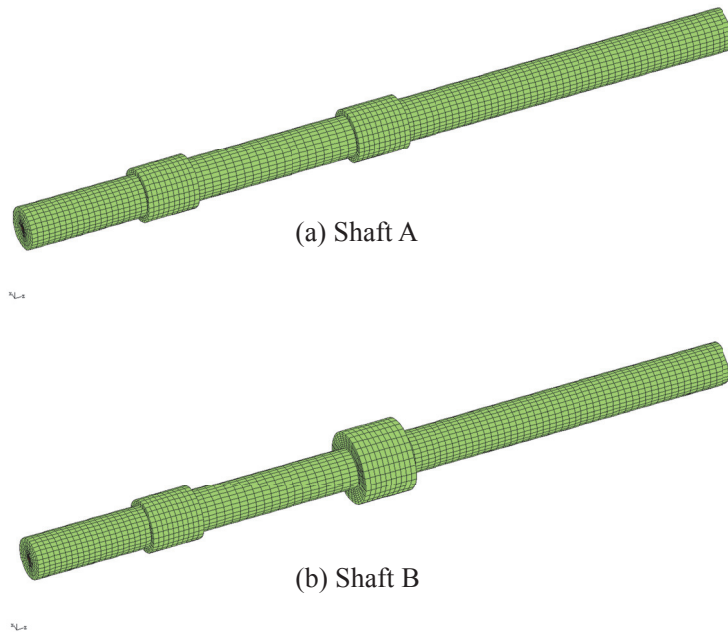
3D FEM models of shafts with stepped cross-sections (Shaft A & B)
